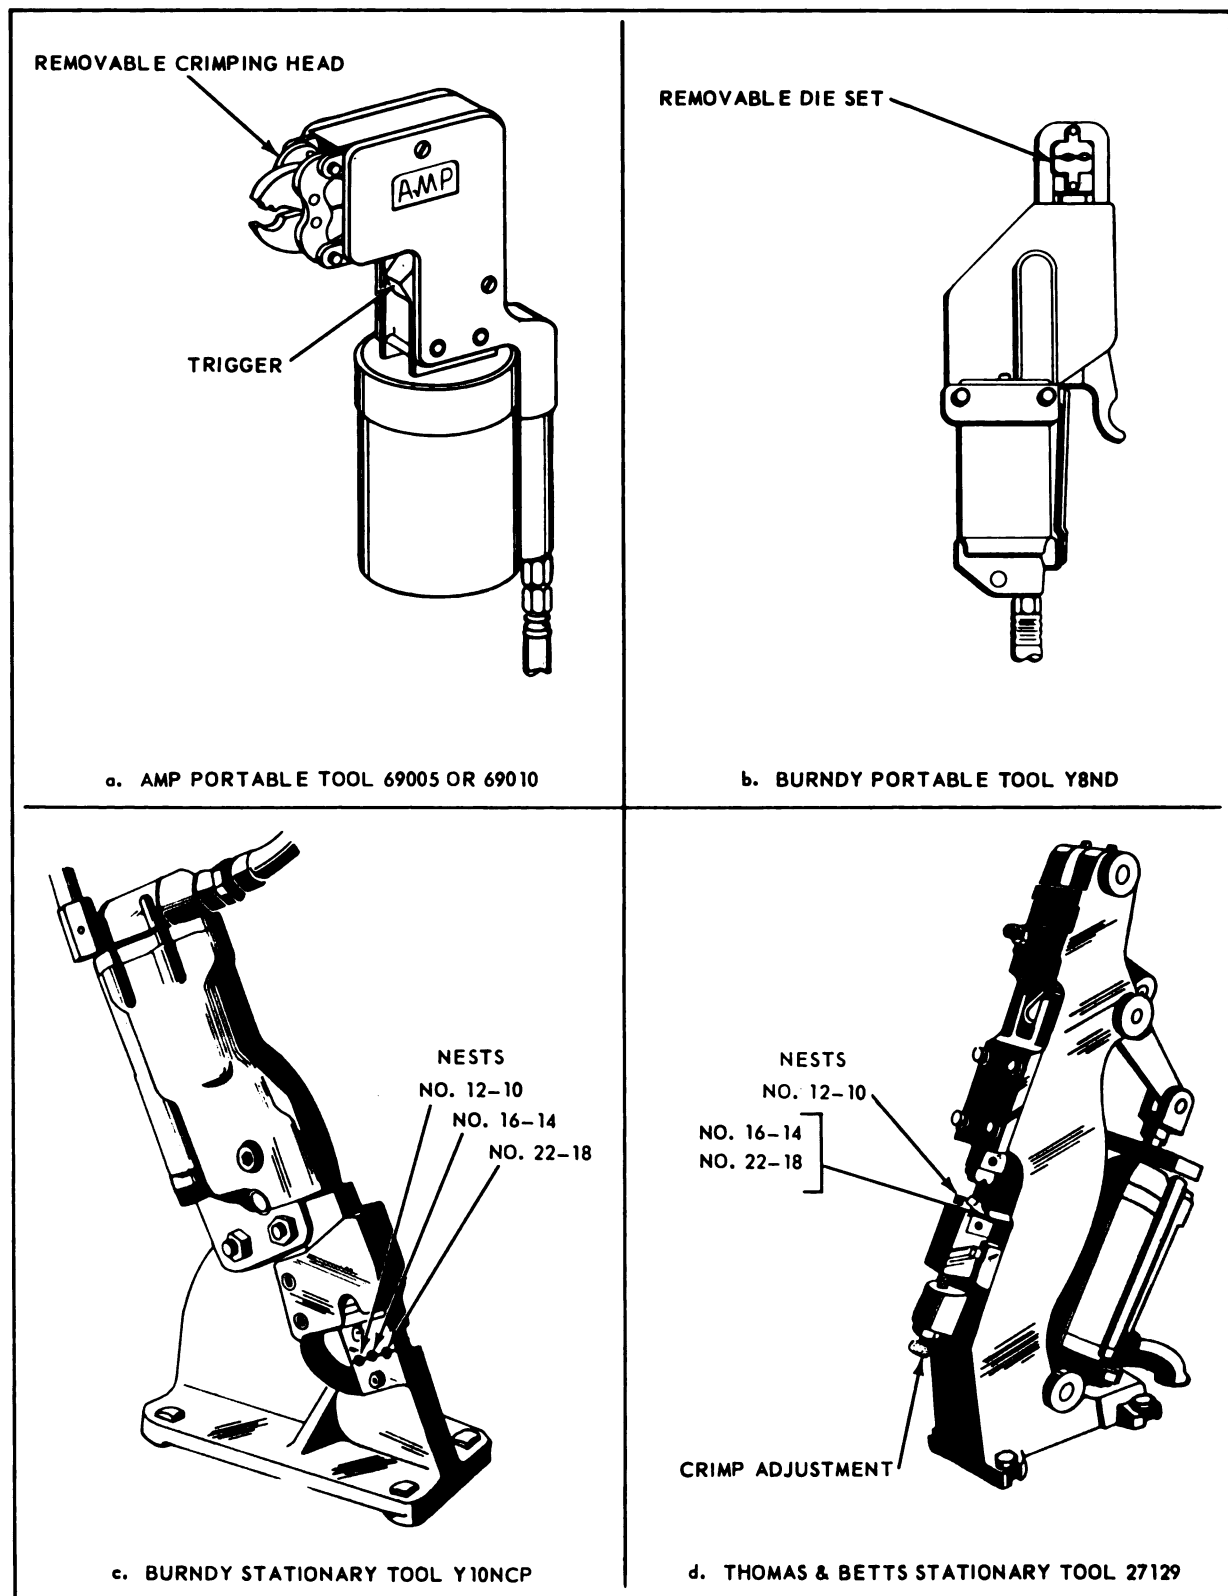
Tools - Power Crimping - Pre-Insulated Copper Terminal Lugs
